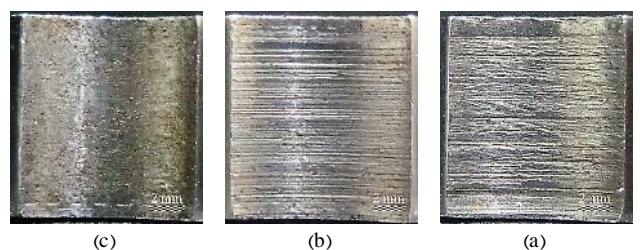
Holes surface texture in levels of $V_c = -1$ and $f_z = -1$ in a- drilling, b- drilling with pre-drill, c- helical milling
